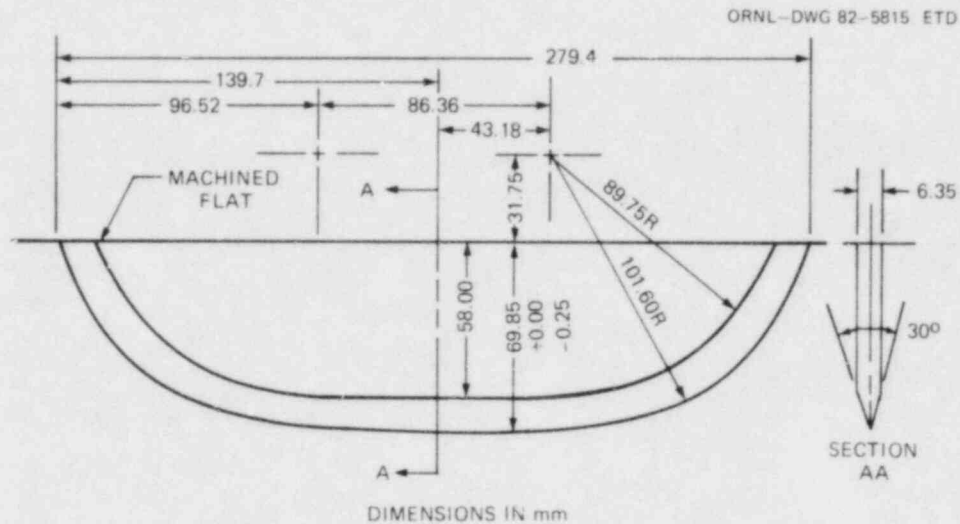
Configuration of V-8A machined notch, a sectional view of the radial-axial plane of the vessel that is the plane of symmetry of the flaw.
